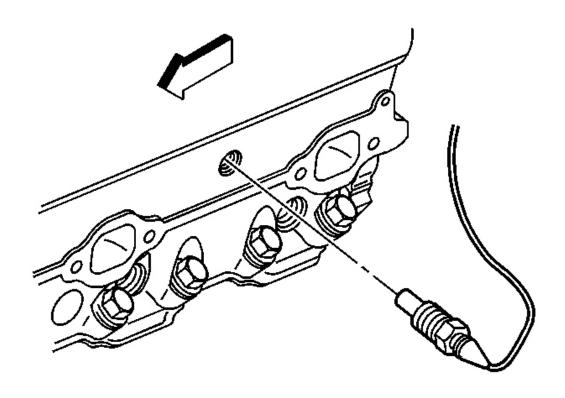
Engine Coolant Temperature Gage Sensor Courtesy of GENERAL MOTORS CORP.
